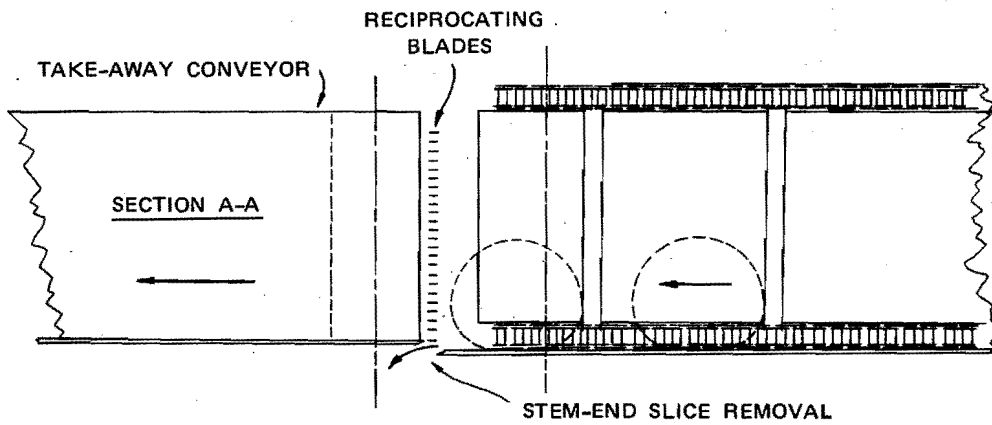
SIDE VIEW OF TOMATO SLICING MACHINE
